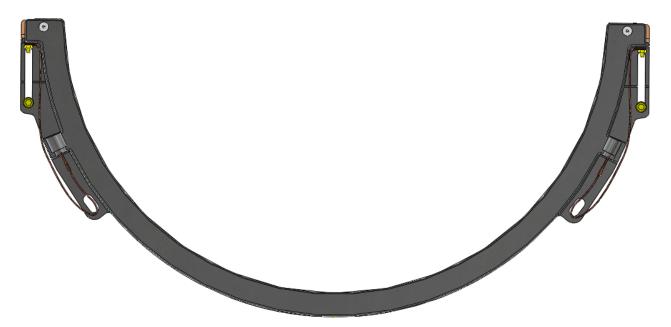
Final Design Lower RH Assembly, D1001895-v4.
